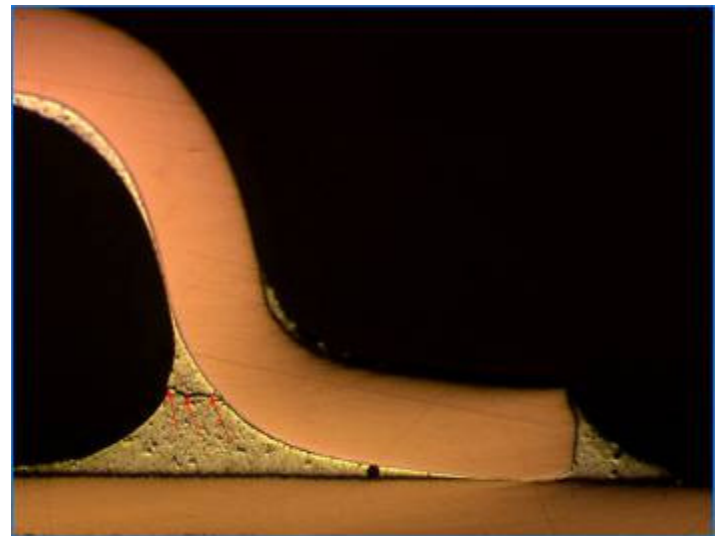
cross section, SN63, U31, right lead solder crack, 100x
